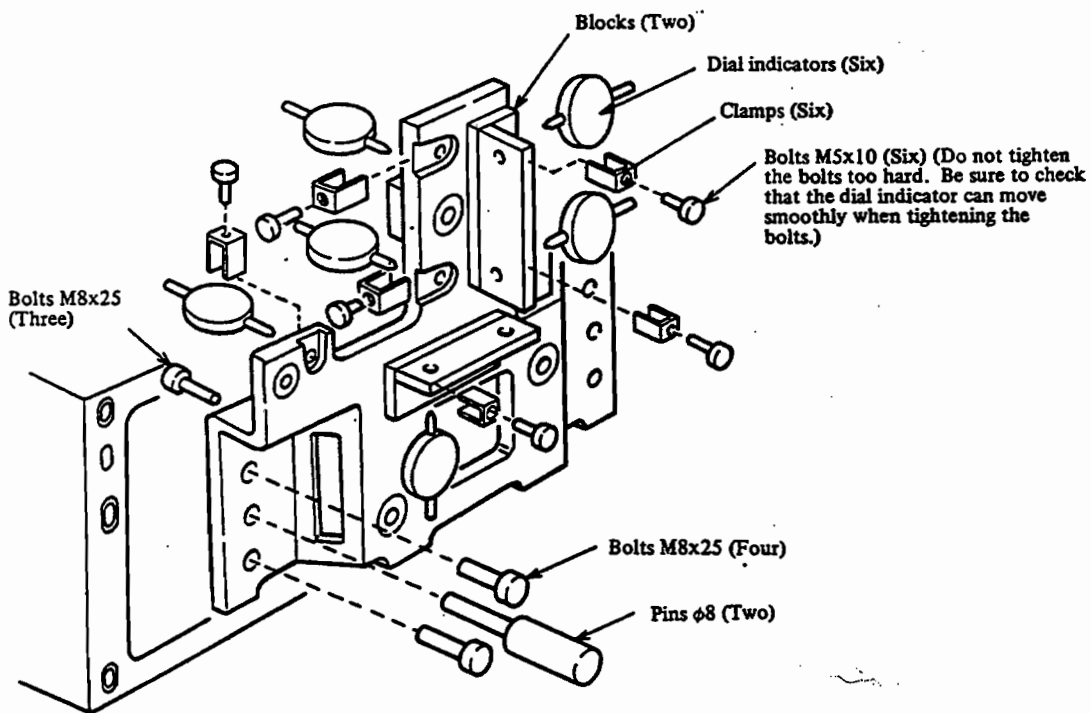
(a) Mounting mastering fixture on robot main frame (S-700)
